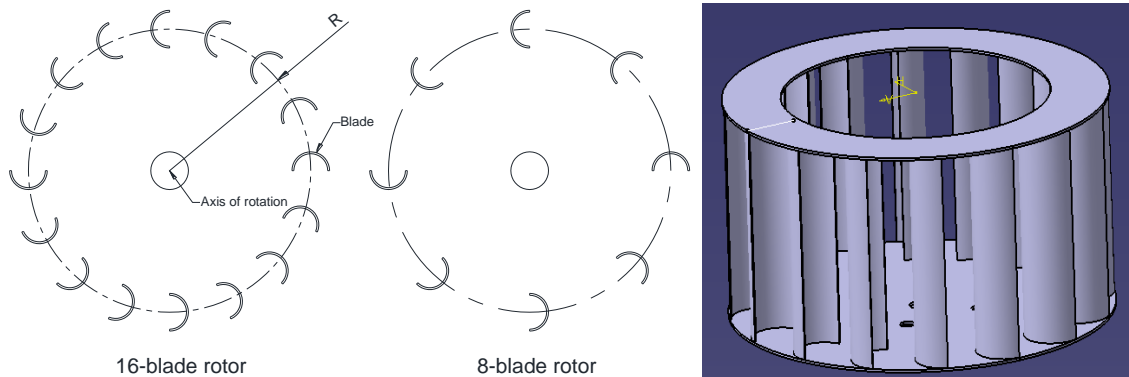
(a) schematic of wind turbine rotors; (b) 3D model of the 16-blade rotor.
